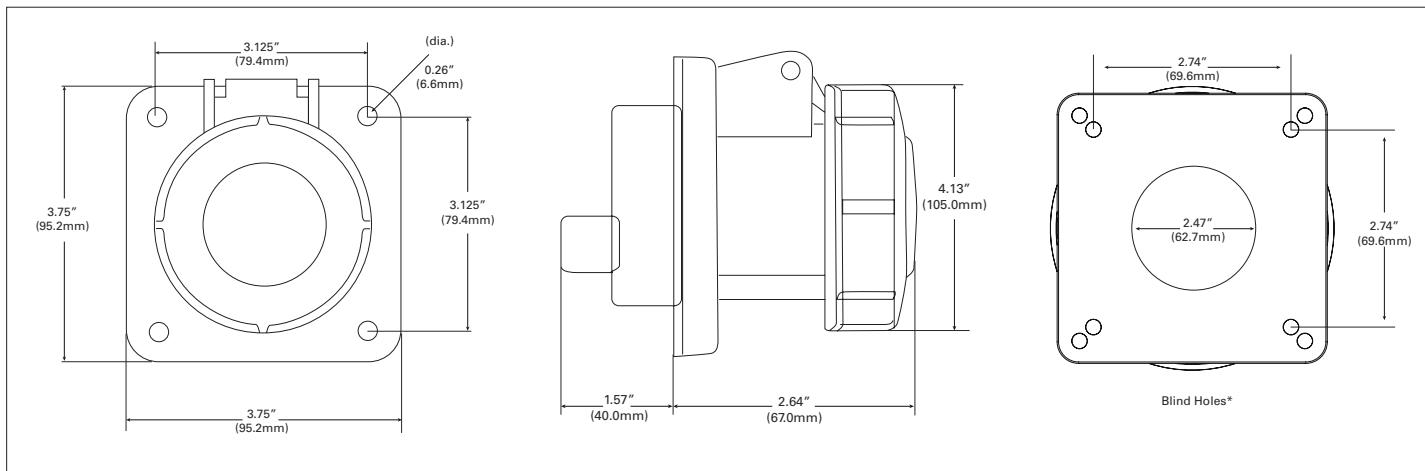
30A & 32A 4-P, 5-W Receptacles, Front, Side & Back Views
